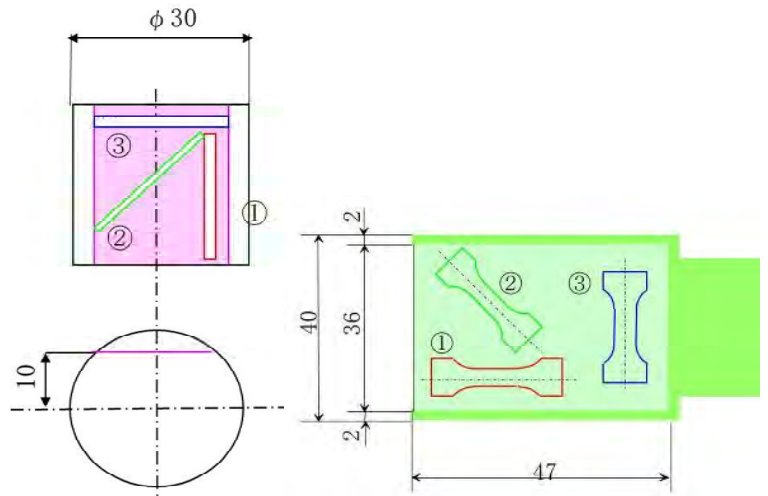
Cutting out positions from CREO rod sample and forged sample
